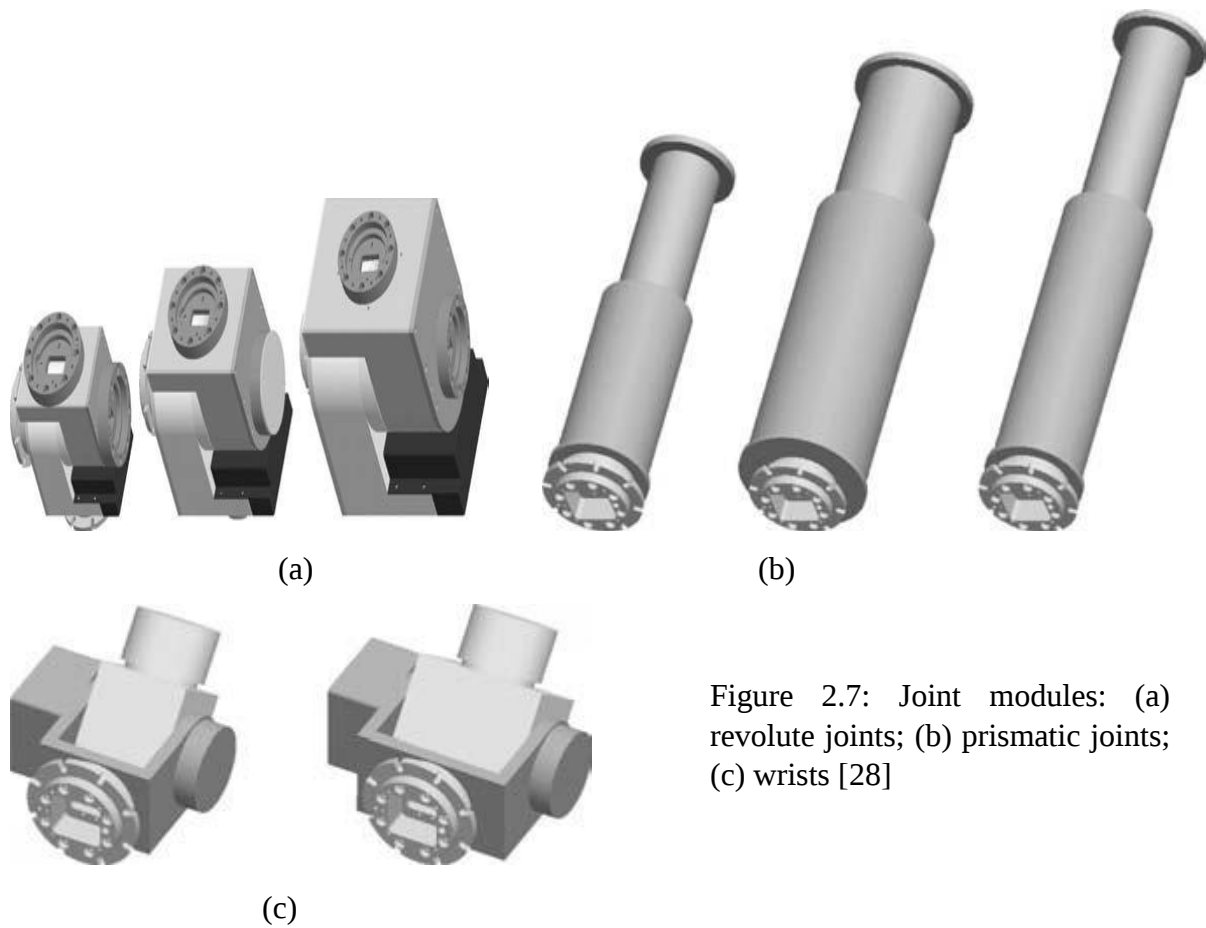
Joint modules: (a) revolute joints; (b) prismatic joints; (c) wrists [28]
